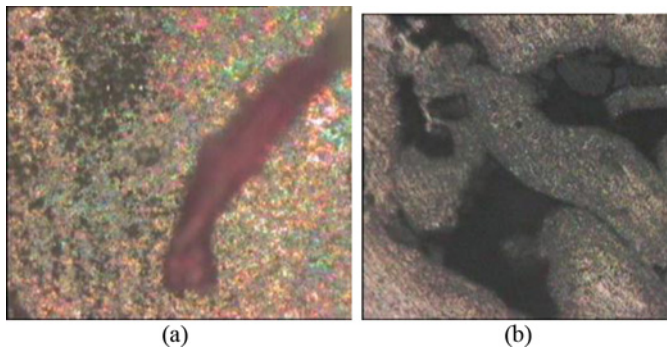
(a) Unmolded copper strip in weld zone. (b) Discontinuities in weldments. Copper strip weldments (color figure available online).
